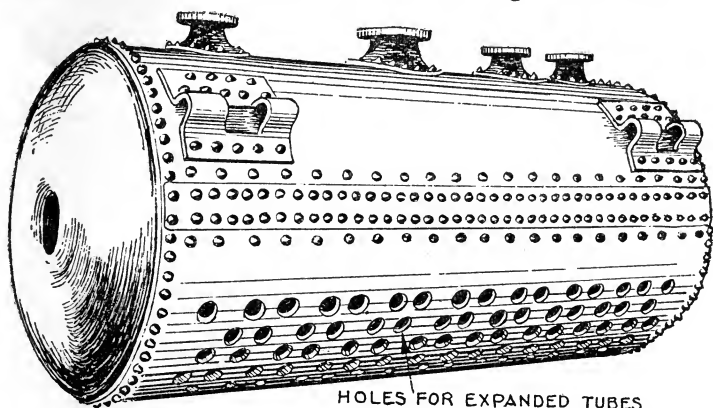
,991.—Ladd transverse steam drum with holes for expanded tubes. *In construction* the drums are of one or two sheets without circumferential sheet seams. The longitudinal seams are above the roof tile, the head seams being protected by the side walls. The man-hole covers are of the un-swinging type, and all flanges and connections are of wrought metal.
